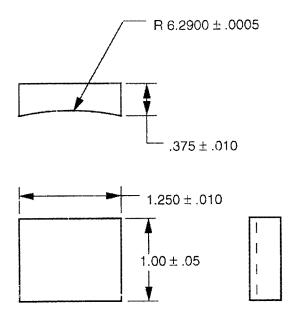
Lower concave inspection fixture pressure pad.
